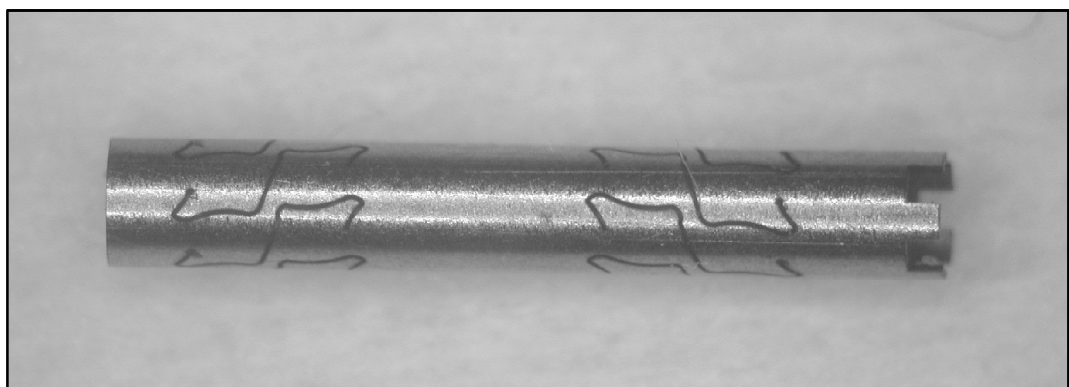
PRELIMINARY IMPLANT FABRICATED ON LASER CUTTING MACHINE
